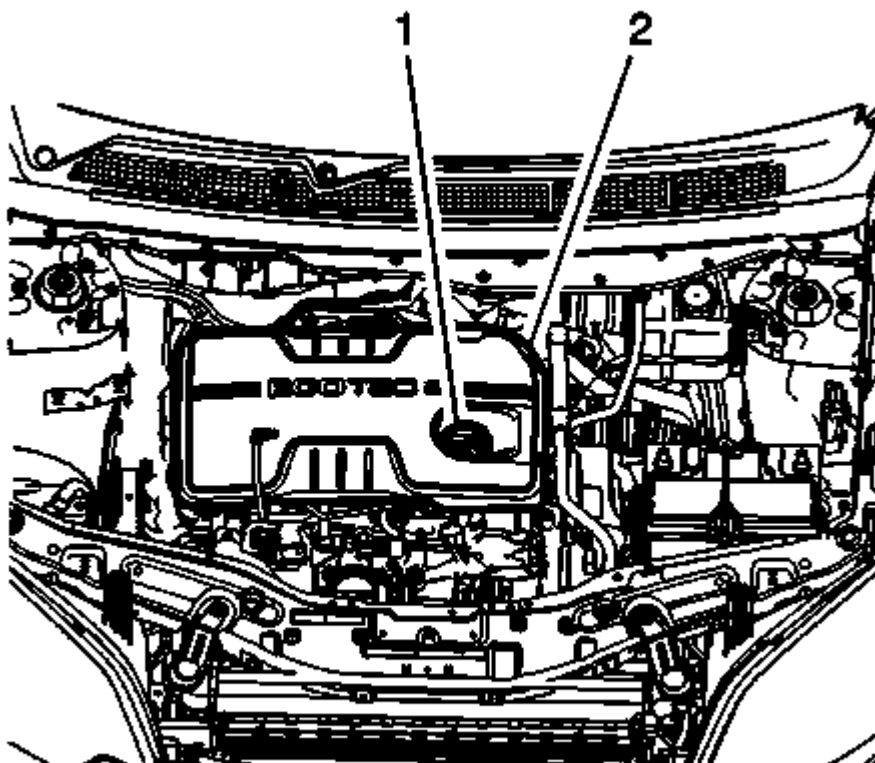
Fuel Rail Harness Connector Bracket And Intake Manifold Insulator
